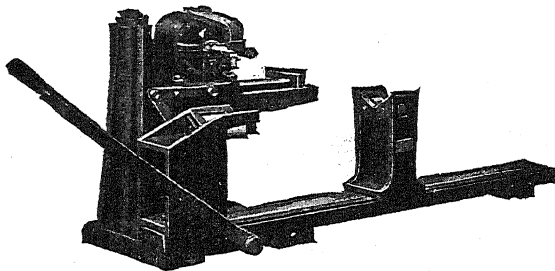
General Electric commutator grooving machine; stationary model. *In construction*, the rotating saw is mounted on the end of the motor shaft which is extended and supported by an offset bearing, which readily permits the grooving of commutators having ears. Owing to the small size of the motors used with these machines, no starting resistance is necessary.
